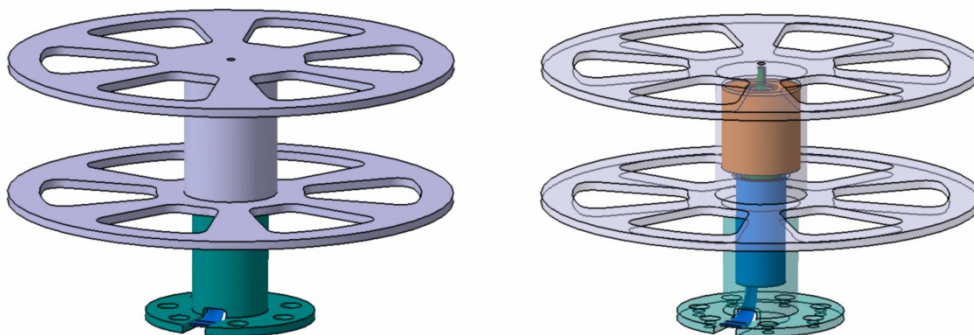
Assembled separate reel deployment mechanism, on the right side the reel and a holder are transparent to show the position of the motor and the sliding bearing.
